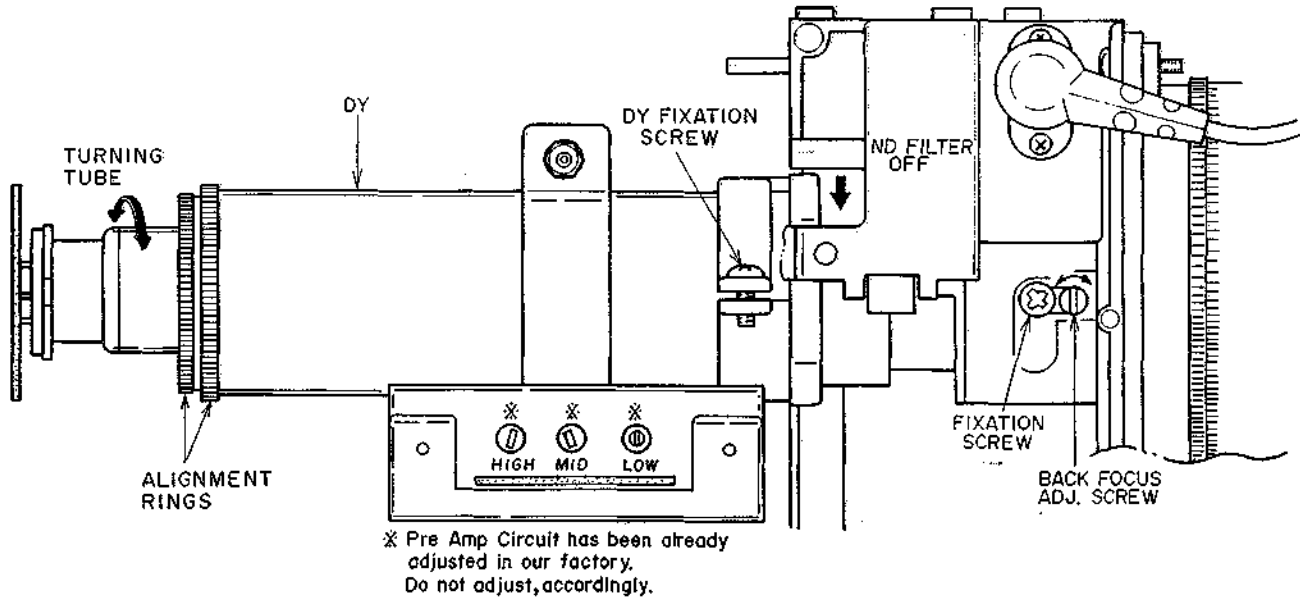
Mechanical Adjustment Points (Right Side)
